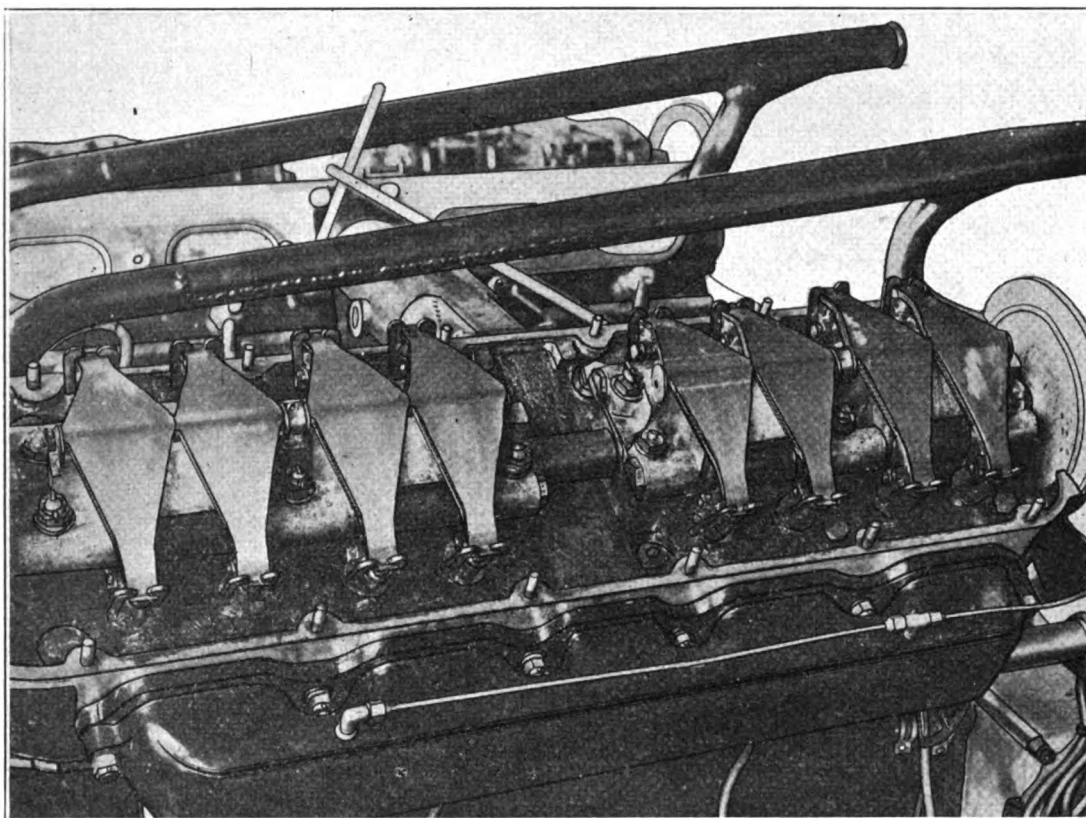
View of head ,with cover removed ,showing valve gear and flat springs.
